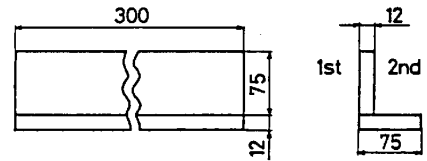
Dimension of horizontal fillet welding specimen
